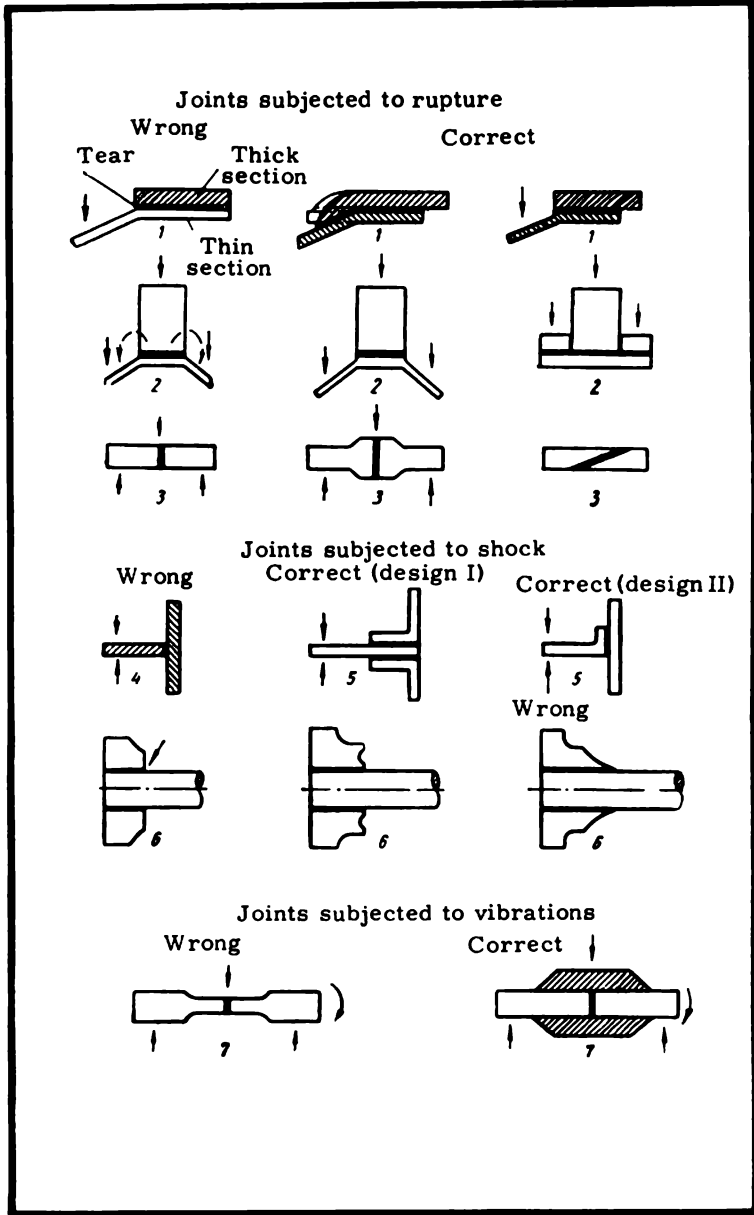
Correct and incorrect design of soldered joints in parts subjected to rupture, shock and vibration
